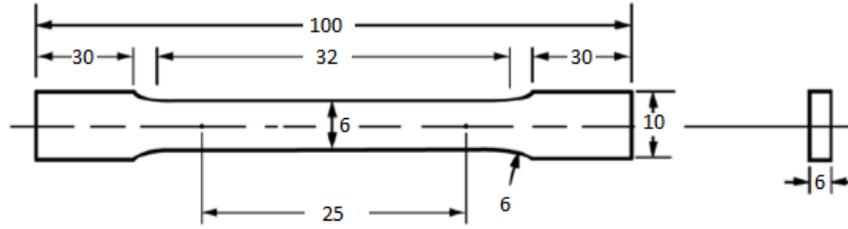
(a). Dimensions of a tensile testing sample (All dimensions in mm)
